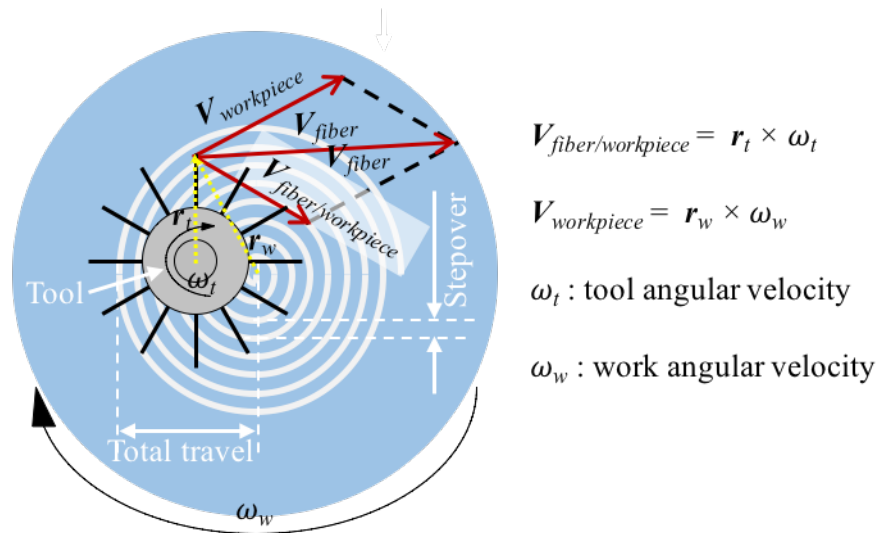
Top view of the spiral polishing configuration and the tool kinematics
